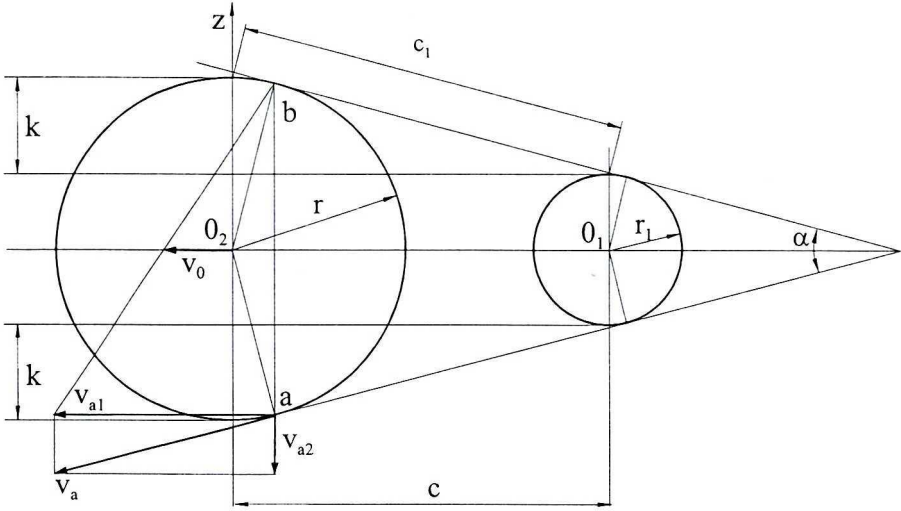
Change in piece dimensions being formed between two working surfaces
